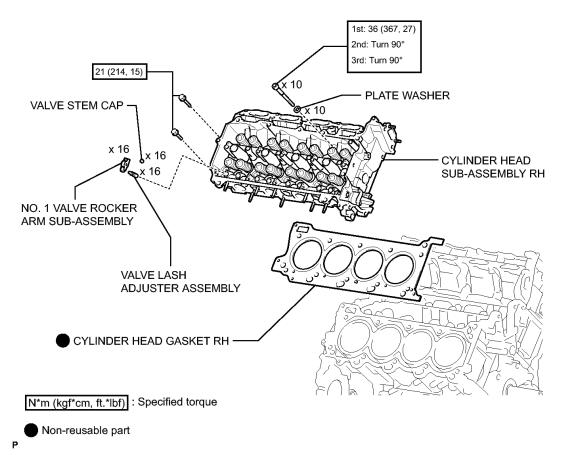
Identifying Cylinder Head Gasket (For Bank 2) Replacement Components With Torque Specifications
